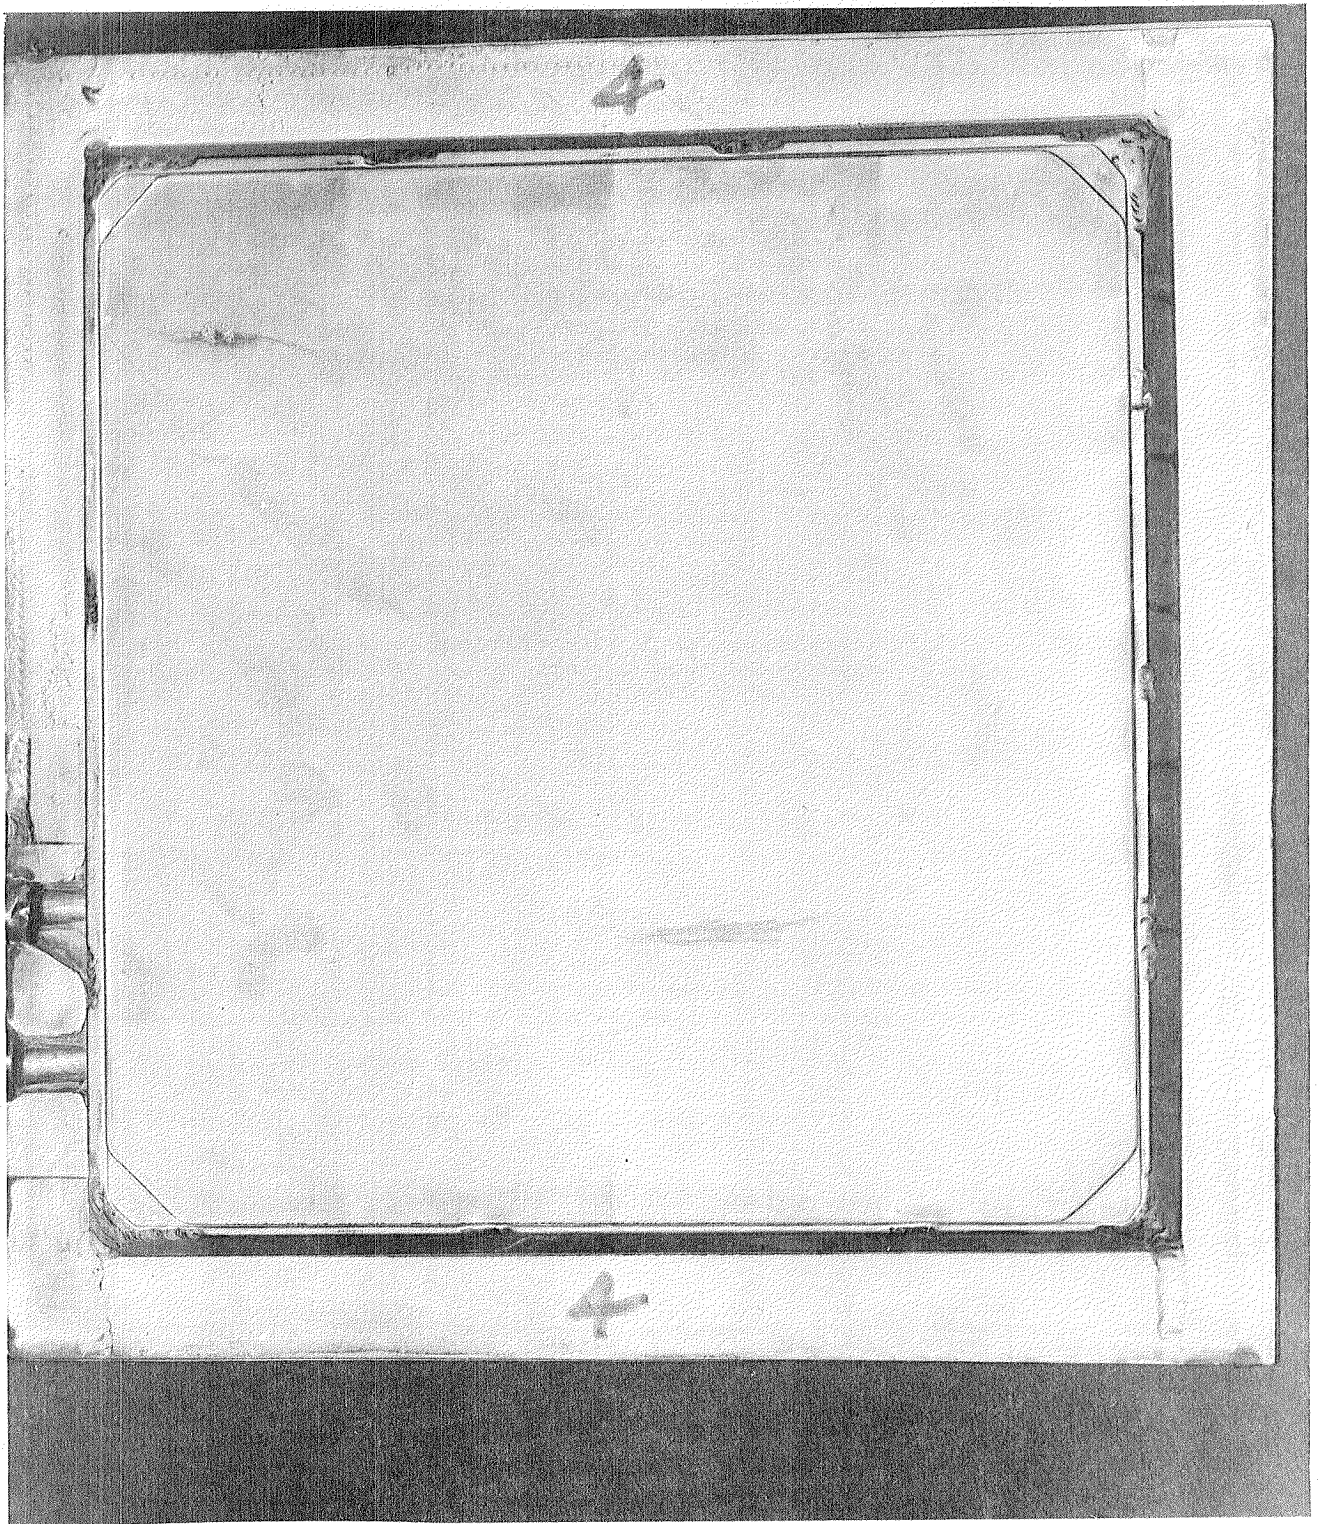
PANEL NO. 4 BOTTOM FACE SHEET
